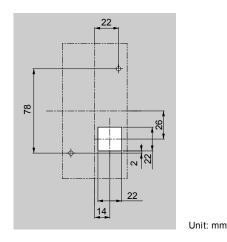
Panel Cut-Out Dimensions (External/Face-Mount Installation)
